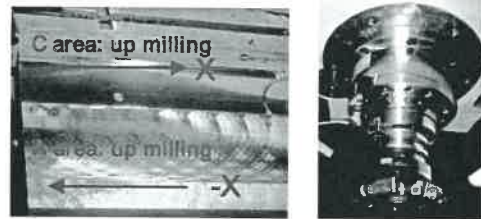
Tool marks generated on the workpiece are from the tool itself and two different feed directions.
